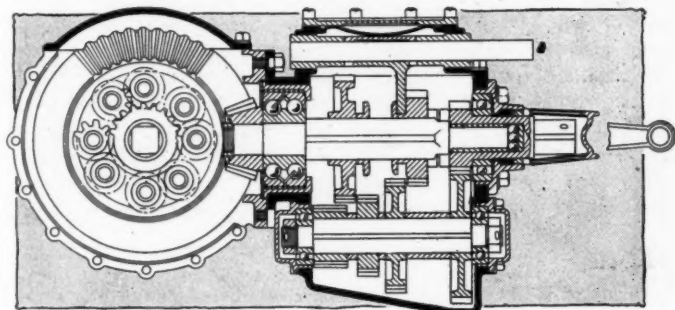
Lefever gearset for trucks up to 40 horsepower
